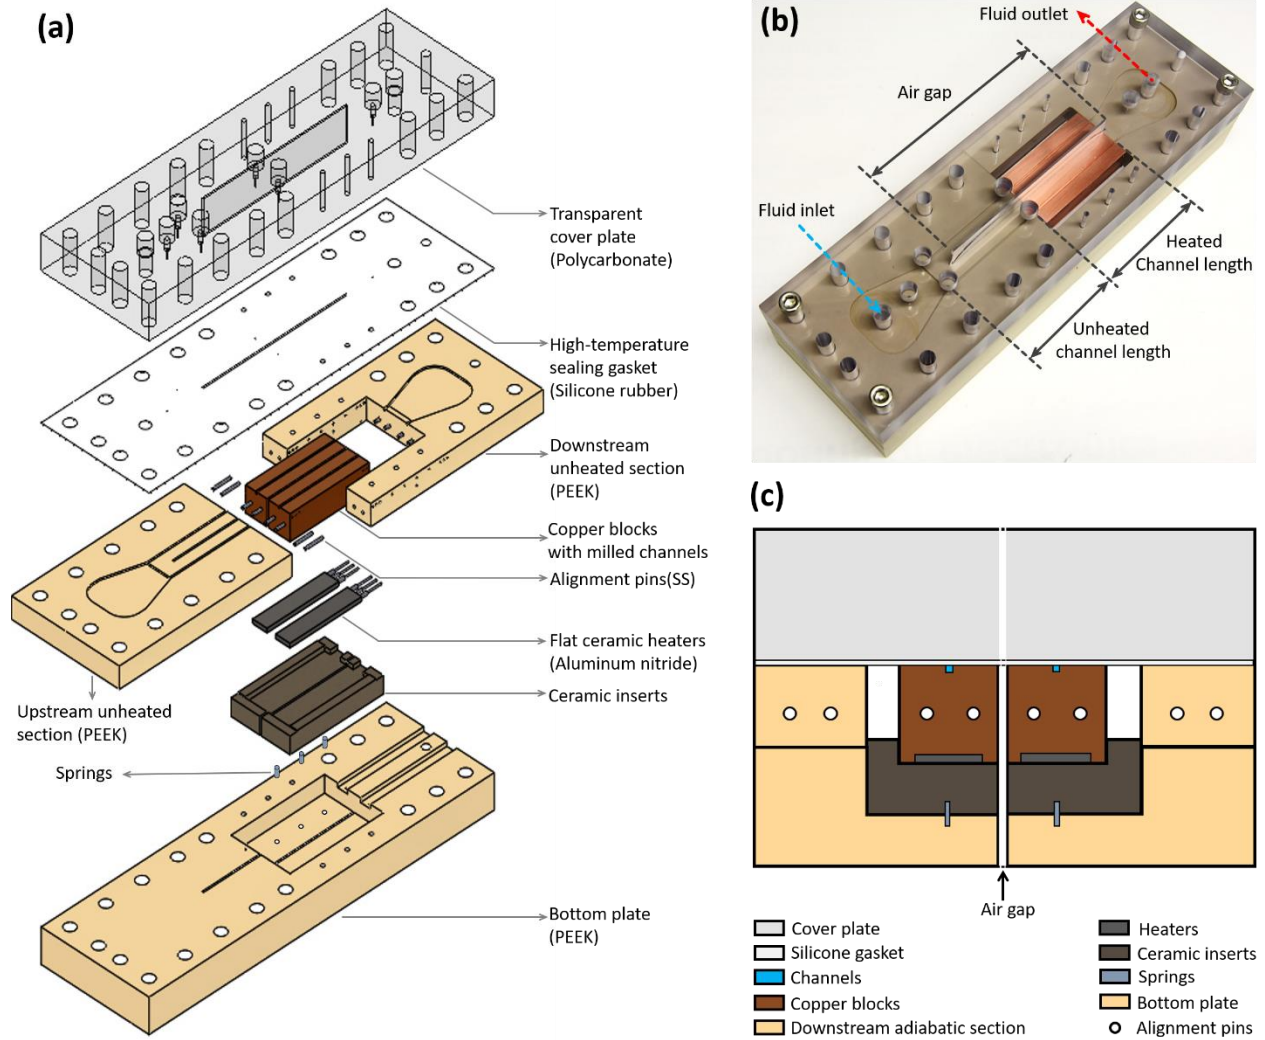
Test section assembly: (a) exploded isometric view, (b) photograph of the assembly showing the heated and the unheated portions of the channel length and (c) cross-sectional view along a vertical plane located immediately downstream of the mating faces of the copper blocks and the upstream section. The air gap that maintains thermal isolation between the channels is marked in (b) and (c). [2 columns]
